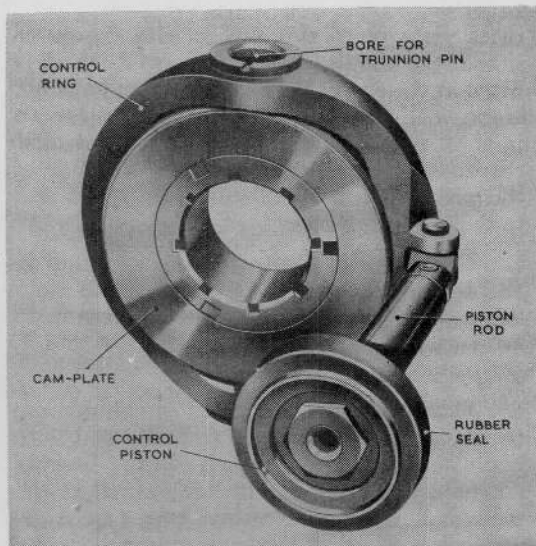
Control piston, cam-plate, control ring and bearing assembly
